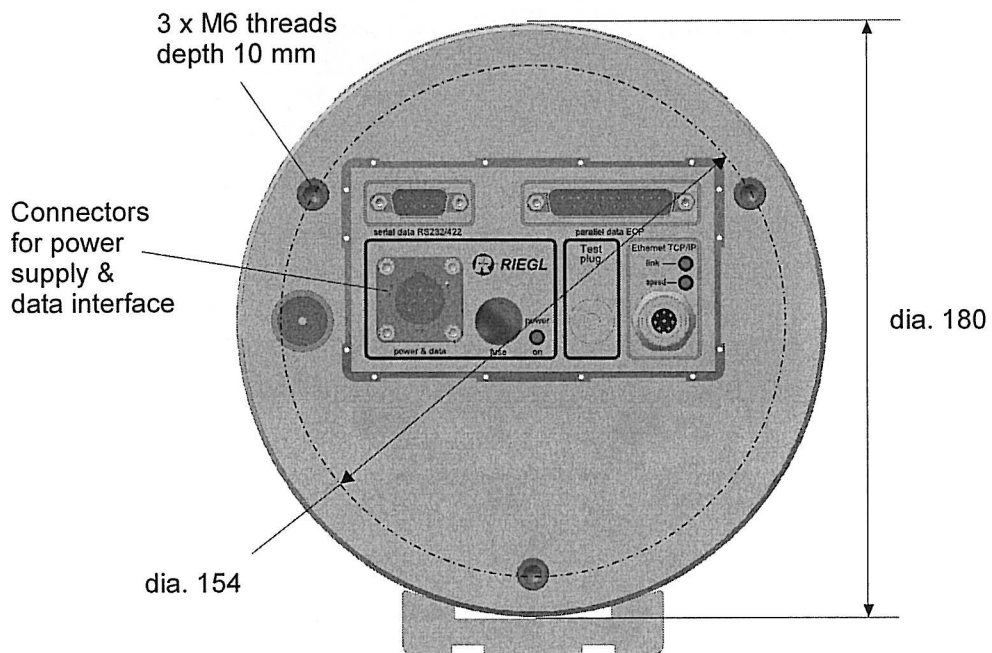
Rear view of LMS-Q240i (rear plate side), all dimensions in mm
